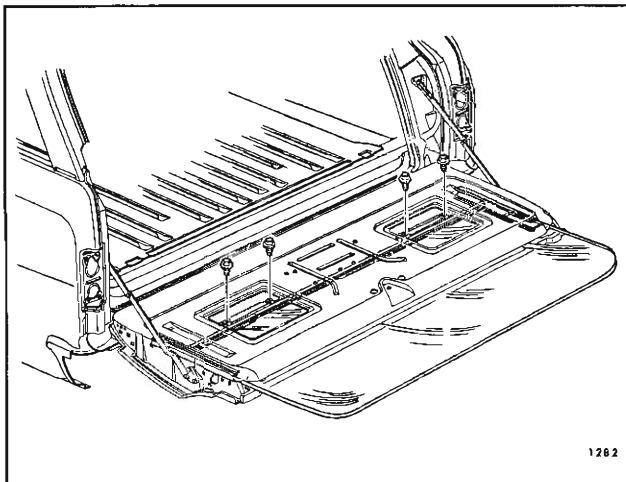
F20—Tail Gate Inner Panel Cams Attachment
